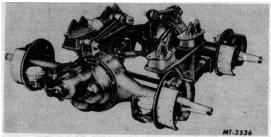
Tandem Axle Suspension System (Rubber Load Cushion Type).
